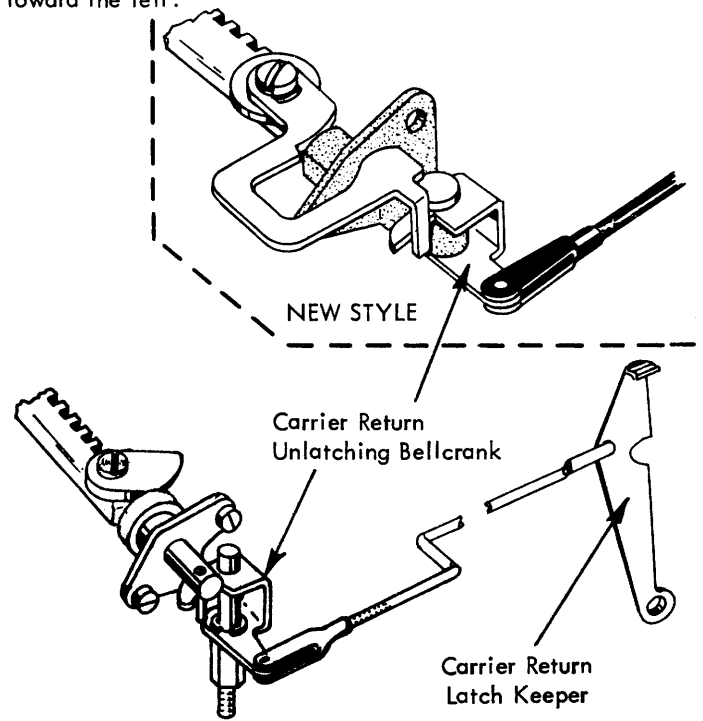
Carrier Return Clutch Unlatching Mechanism
